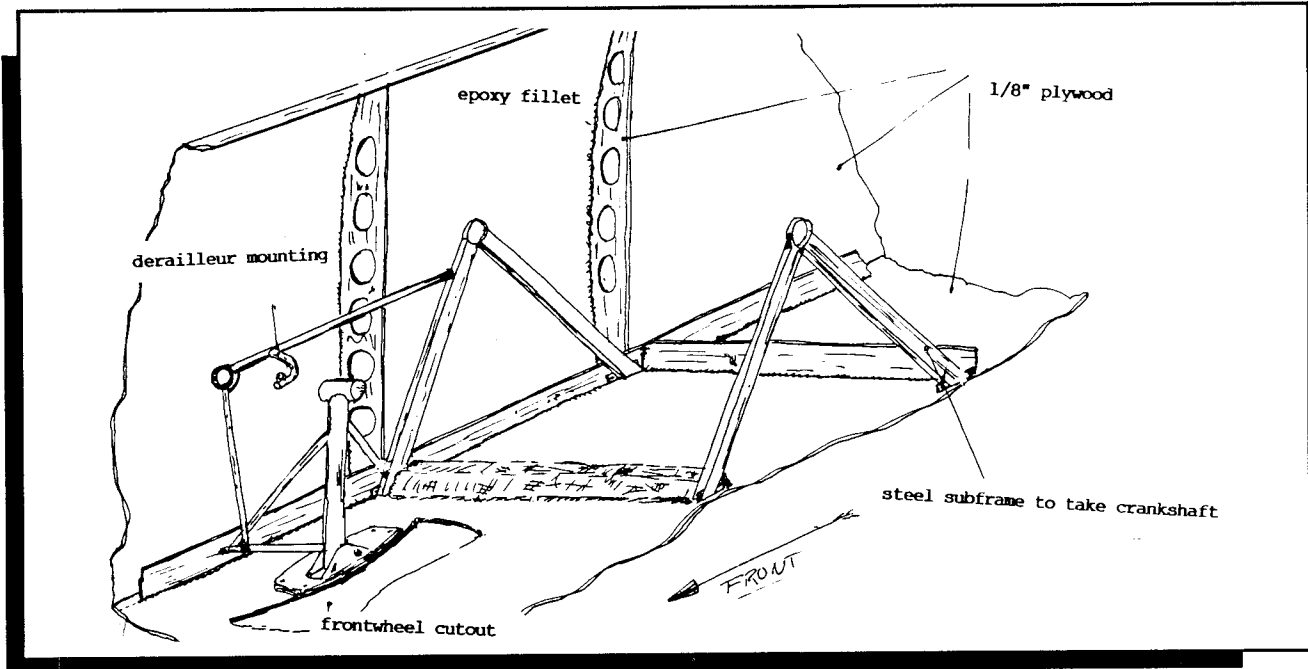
Cutaway shows details of steel subframe, derailleur mounting and fairing construction.
